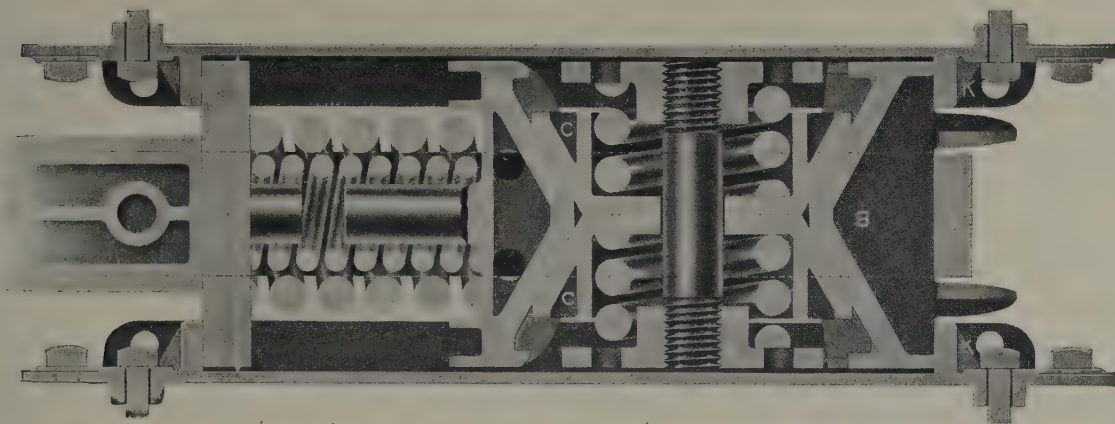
Republic Friction Draft Gear, Type G, with Parts in Normal Position.
